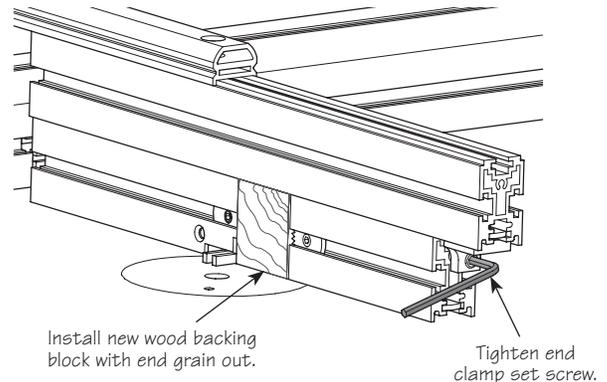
Install new wood backing block (end grain out) and tighten end clamp set screw.
